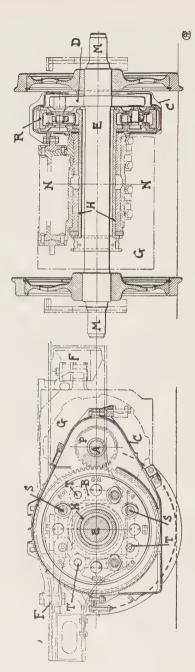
Rod mechanism « Andrews-English Electric », in elevation and sections of the driving axle — generator assembly used on the generator coach (for average speeds) of the LMS (British Railways) dynamometer set. The generators are mounted in the bogie frames in the same the axle centre line. For explanation of betters, soo faxt.
